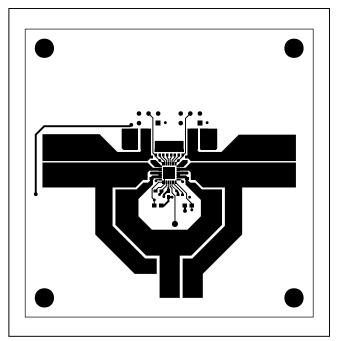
MAX17509 EV Kit PCB Layout—Component Side
